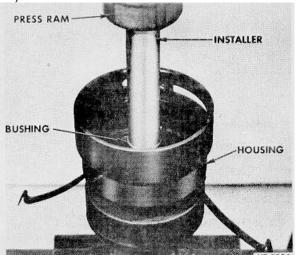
Using Installer SE-1955-8 to Install Upper Bushing.
